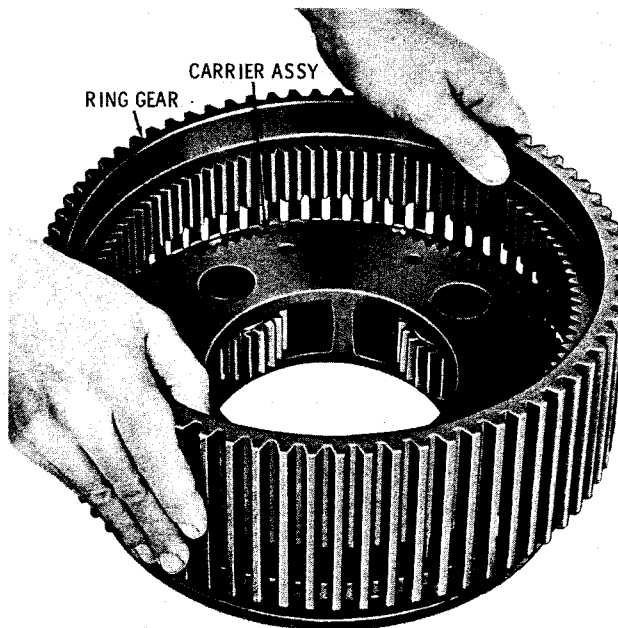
Installing intermediate-range planetary ring gear onto carrier assembly
